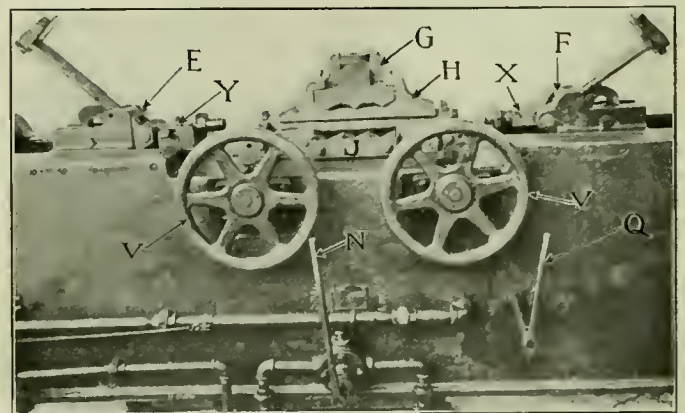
Arrangement for Assembling Hose, Clamps and Fittings
